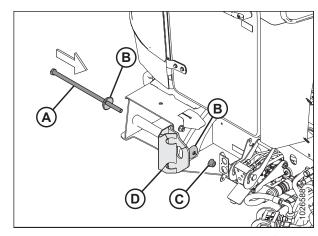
Reinstalling Leg Pin Bolt - Crane Lift Only
